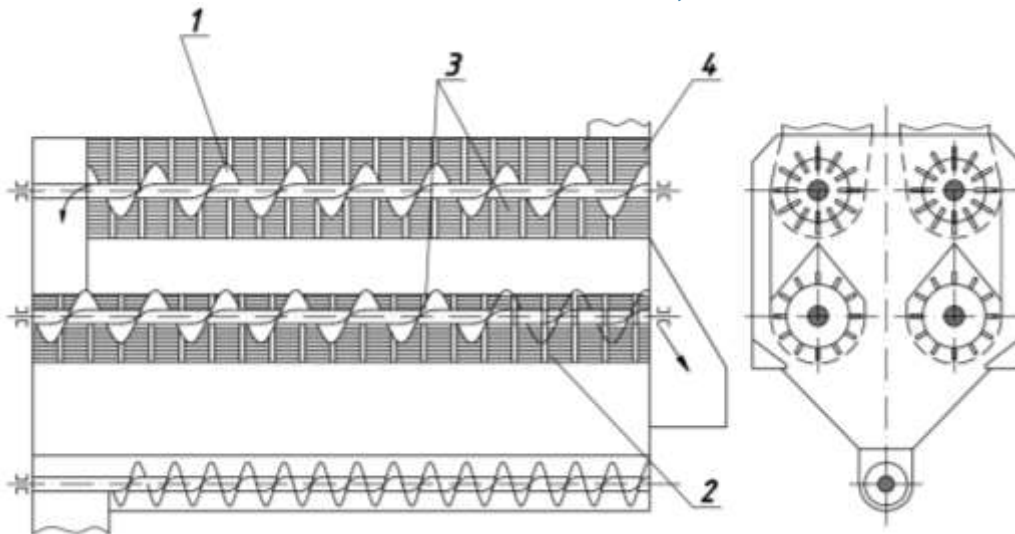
Schematic diagram of the 6A-12M screw cleaning equipment: 1 - upper screw conveyor; 2 - lower screw conveyor; 3 – cleaning ribs; 4 – pile.
